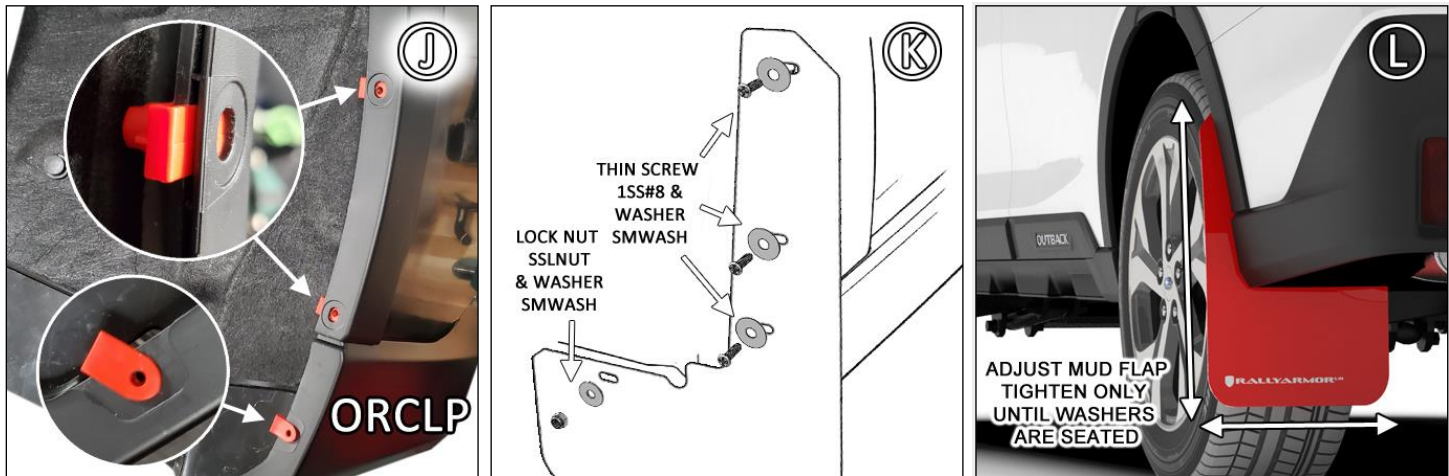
FIGURE J Install three ORANGE CLIP ORCLP to bumper mounting points. Upper two clips mount behind flare, lower clip over flare.
